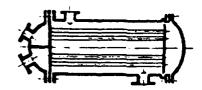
Diagram of heat exchanger with mobile tube plate and fixed cover/cap.
